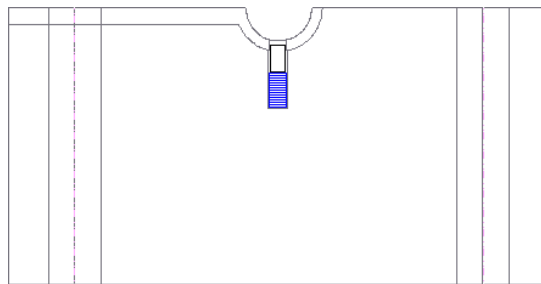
Side View of Thermistor Rake CAD Drawing Showing Spring and Teflon Pin
